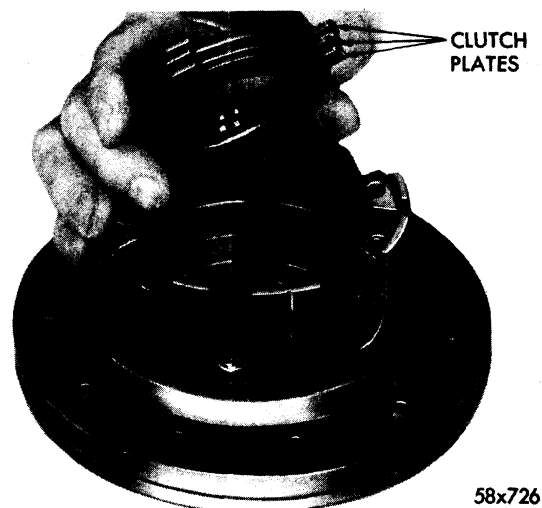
Removing or Installing Clutch Plates from Differential Case
